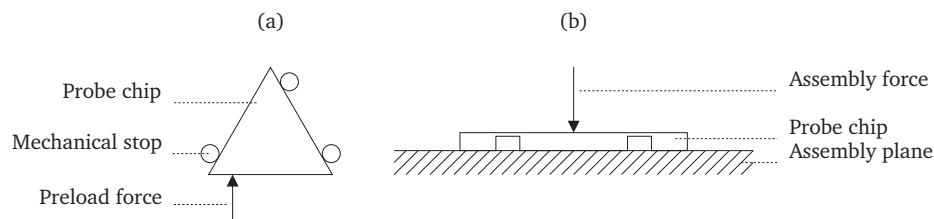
Schematic of the probe assembly, (a) top view and (b) side view.
